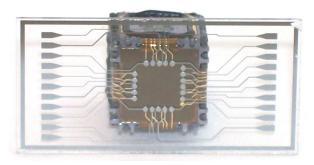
Photograph of an IMU cube mounted to an interconnect plate using flip-chip bonding (bottom view)
